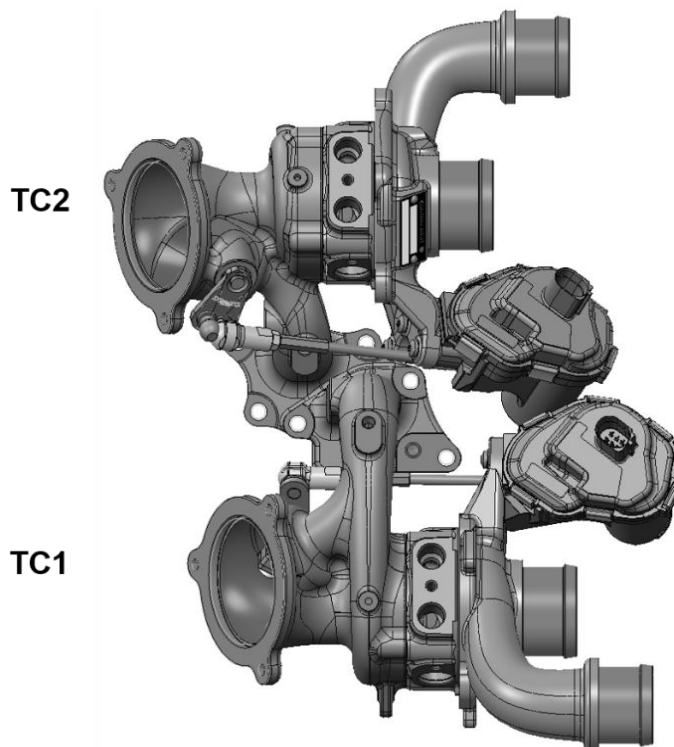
Upper and lower turbocharger assembly of parallel sequential twin boosting system
